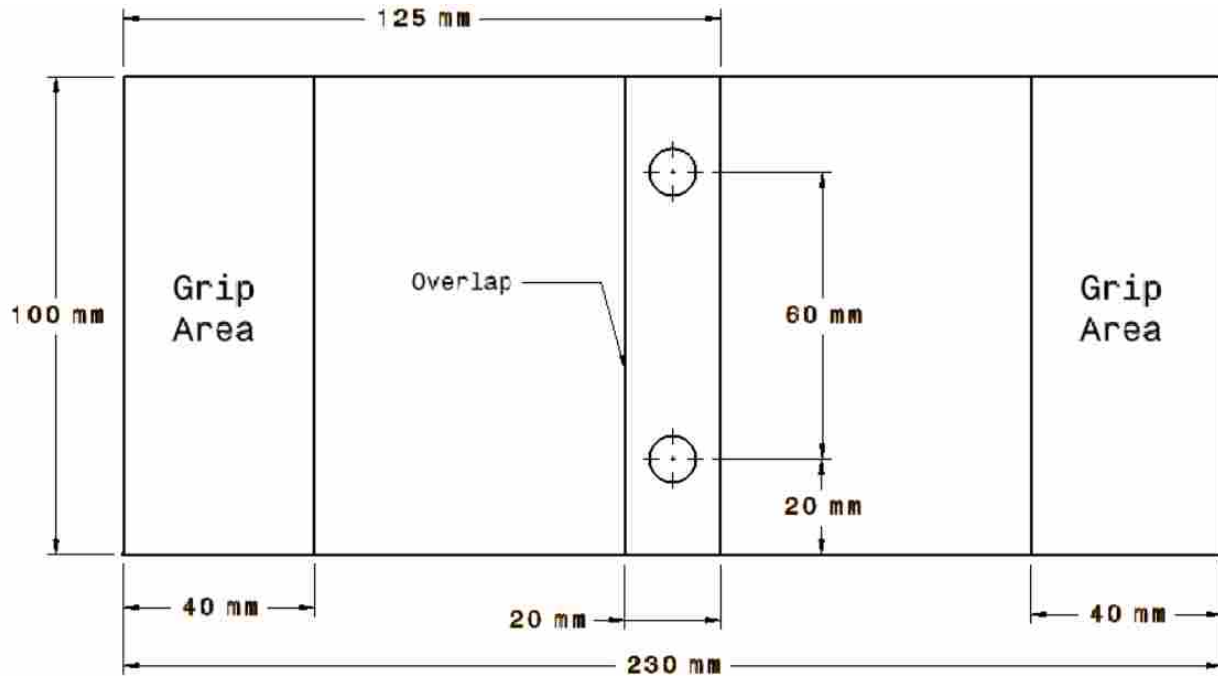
2 Weld, 60mm Spacing on 100mm Wide Lap-Shear Specimens
